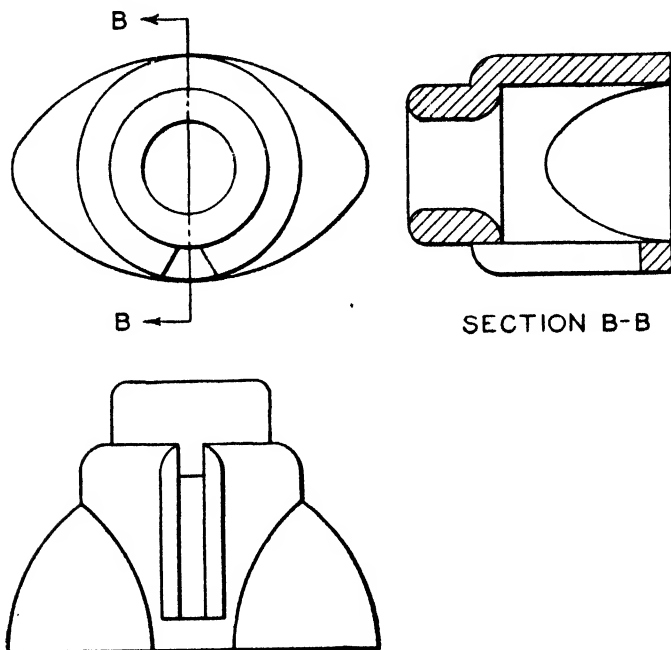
Molding with offset wall. Opening is formed in the side wall by a projection in the mold cavity. The force slides against the inner face of the projection to cut off the material and form the hole but leaves a thin flash at the inner face of the hole. No separate side core is required.
